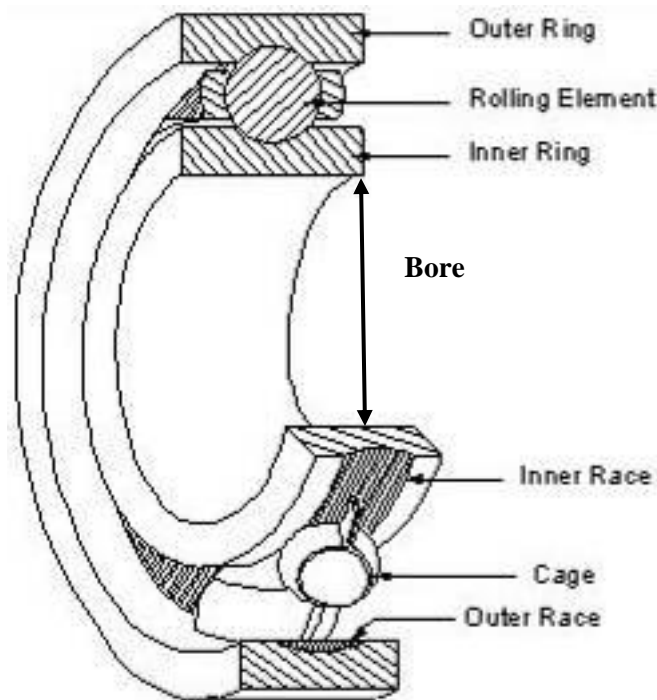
Schematic presentation of a ball bearing with cut through view [34]
